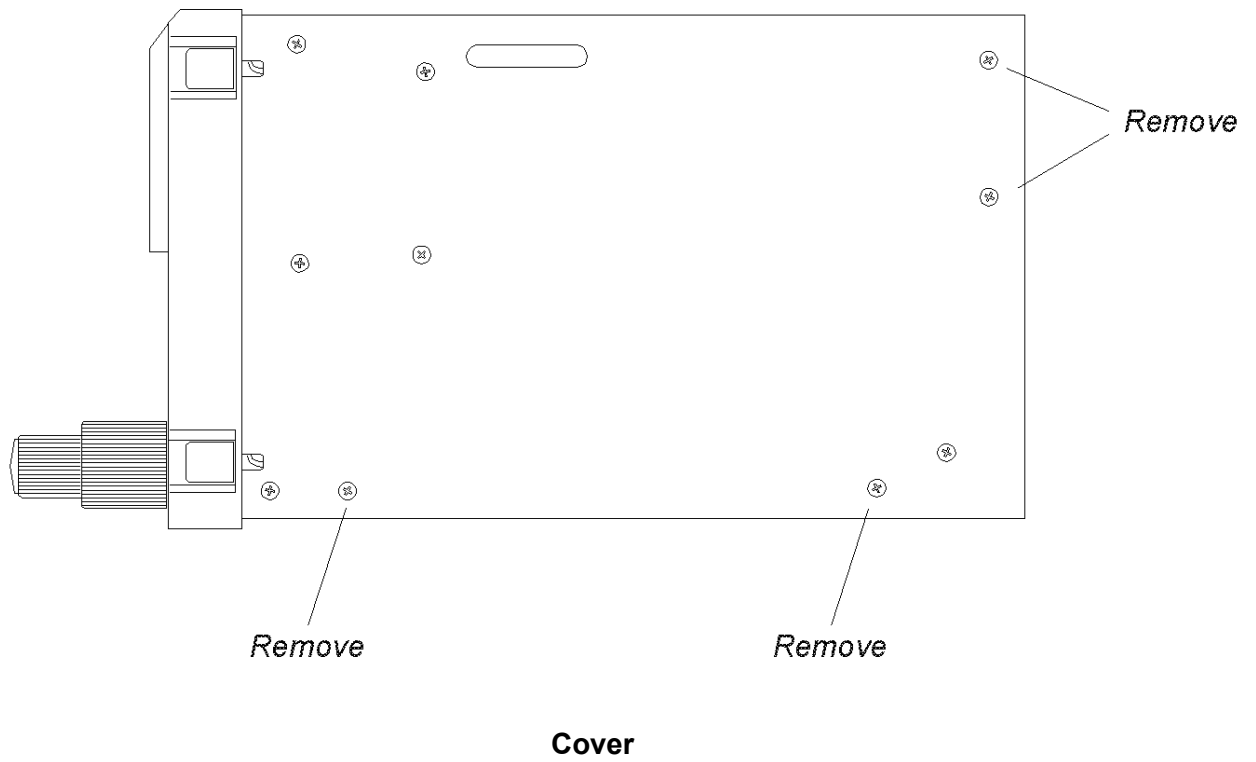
Screw Locations to Remove C-5000 Bottom Cover
